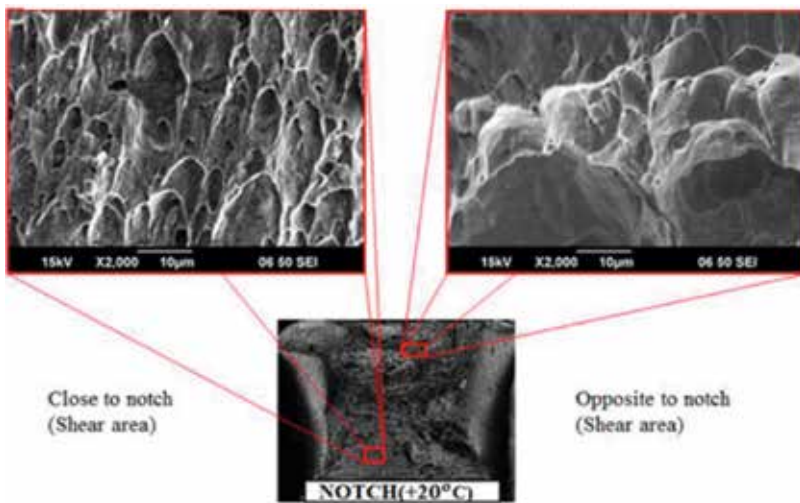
Fracture surface for 10-mm thick CVN specimen tested at +20°C.
